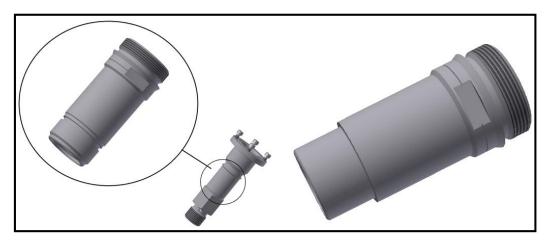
Existing housing and sensor to the left. Modified housing to the right
